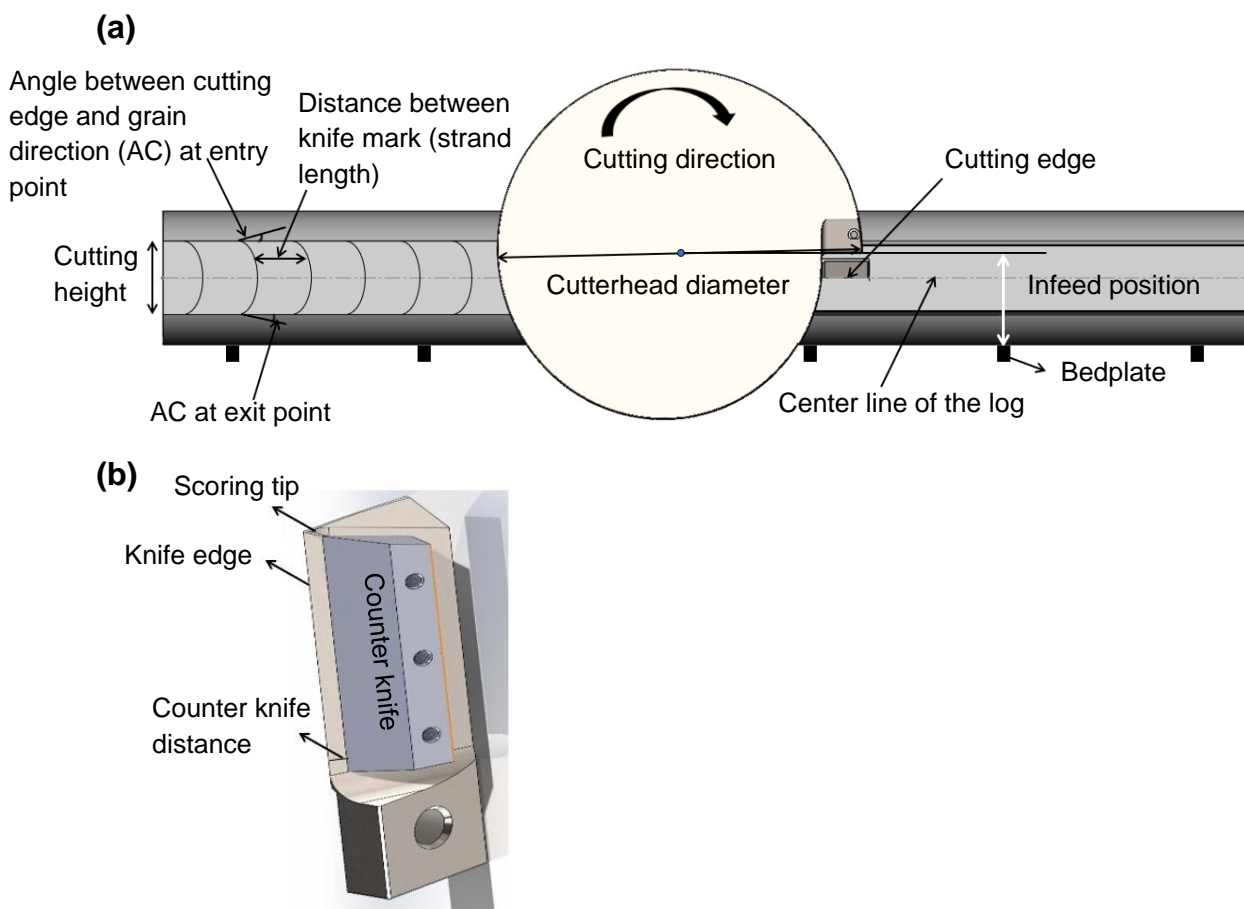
(a) Cutting scheme on strander-canter and (b) knife and counter-knife assembly showing the distance between their edges
